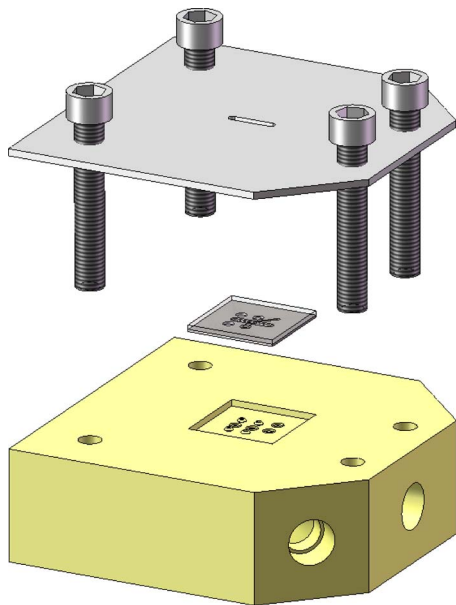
Schematic of the assembly of the fixture, microdevice, and cover plate
